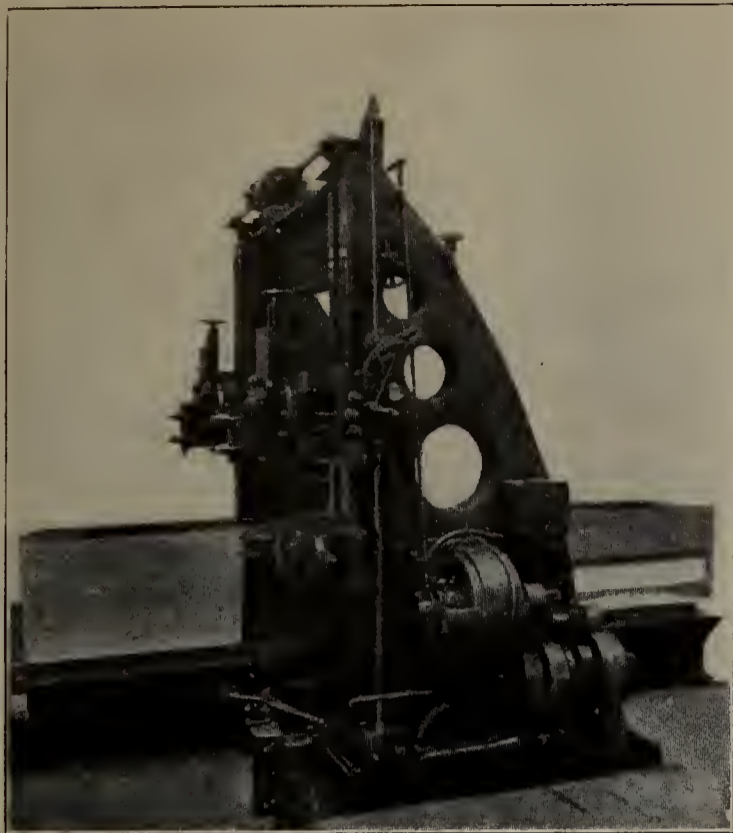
Planer with Motor and Compressed Air Clutch.
